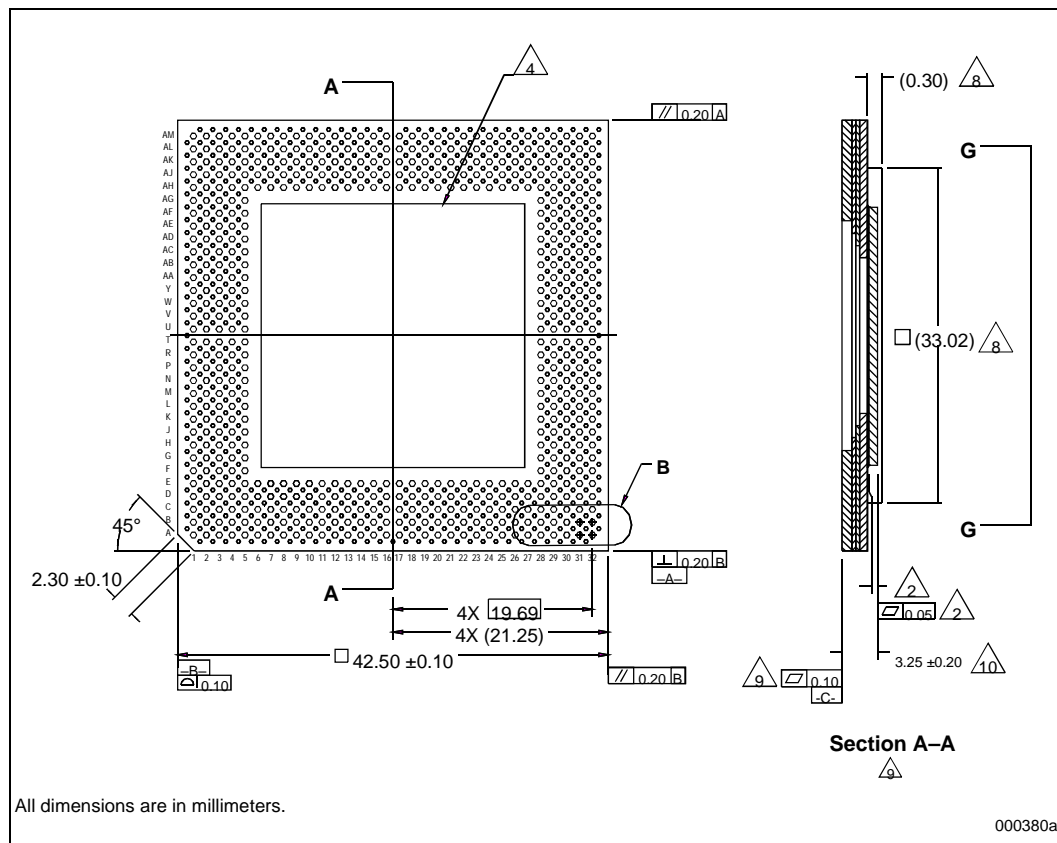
540-ball PLGA Package Dimensions – Bottom View of Exposed Balls and Vias
